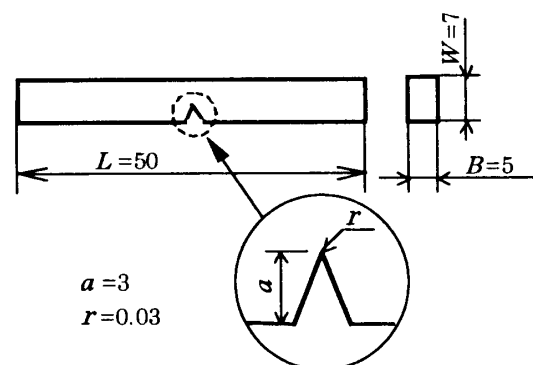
Specimen configuration and dimensions (Notched Specimen)
